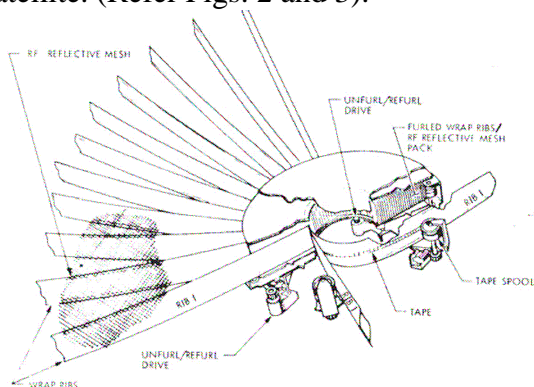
Wrap Rib Antenna mechanism (Exploded view)
